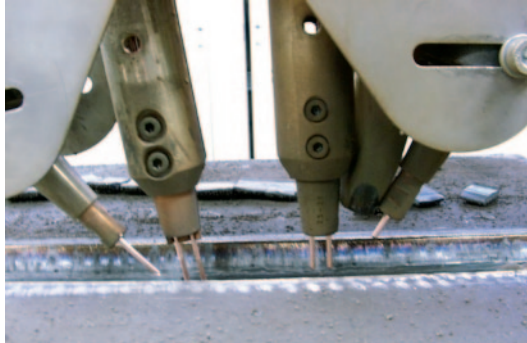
Submerged arc welding with two tandem-wire heads and cold wire added SCWTM (Reproduced courtesy: ESAB)
